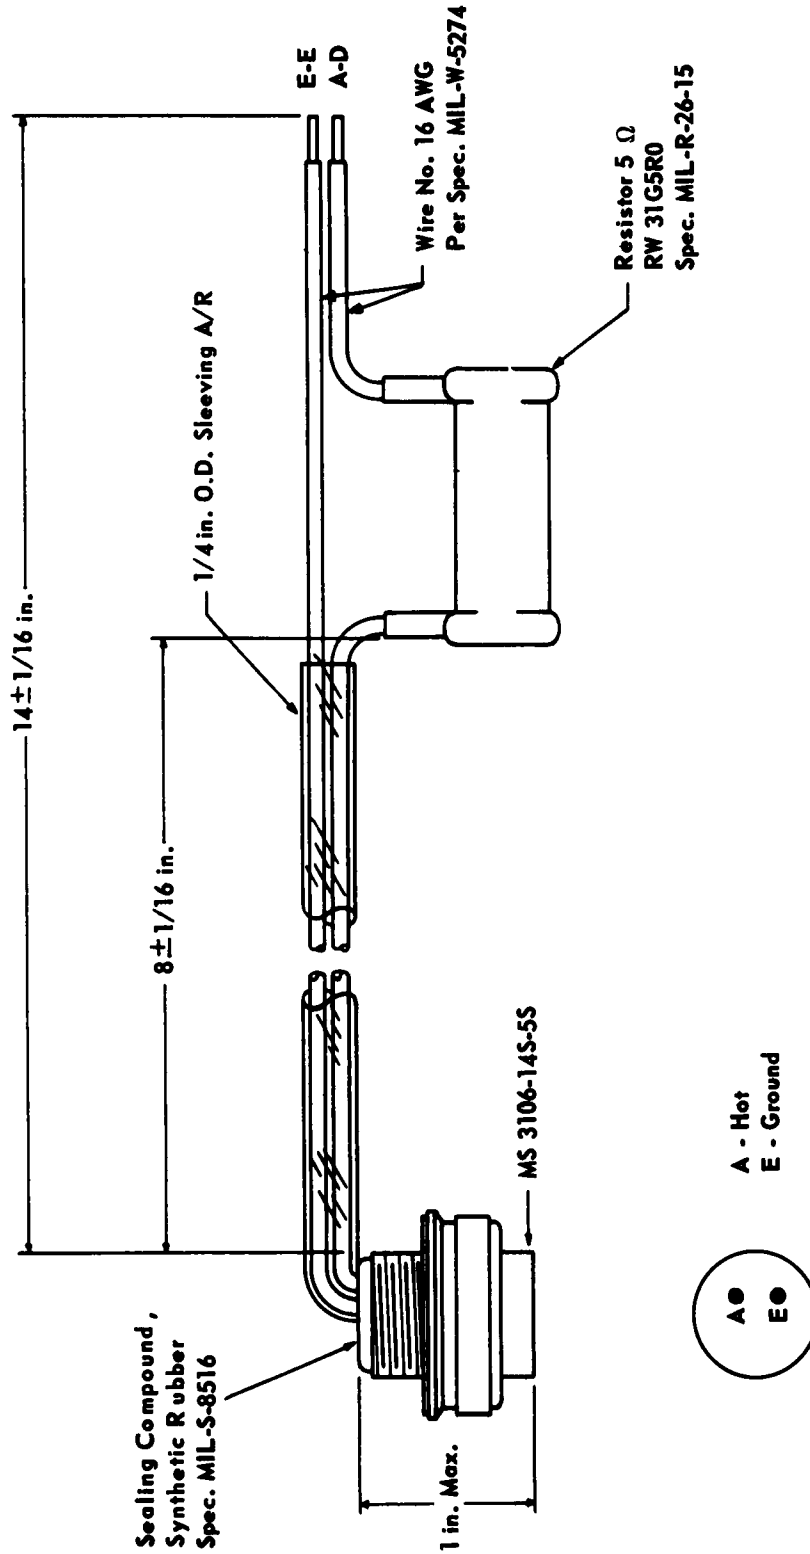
Engineering Drawing of Wiring Harness for Adapting LAU-10/A Rocket Launcher to F-100D Aircraft (Drawing No. X63B1248).
